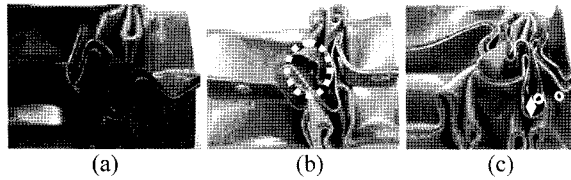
Collapsed mode: (a) spot weld; (b) rivet tail pull-out of self-piercing rivet; (c) bulk failure of adhesive bonding.
